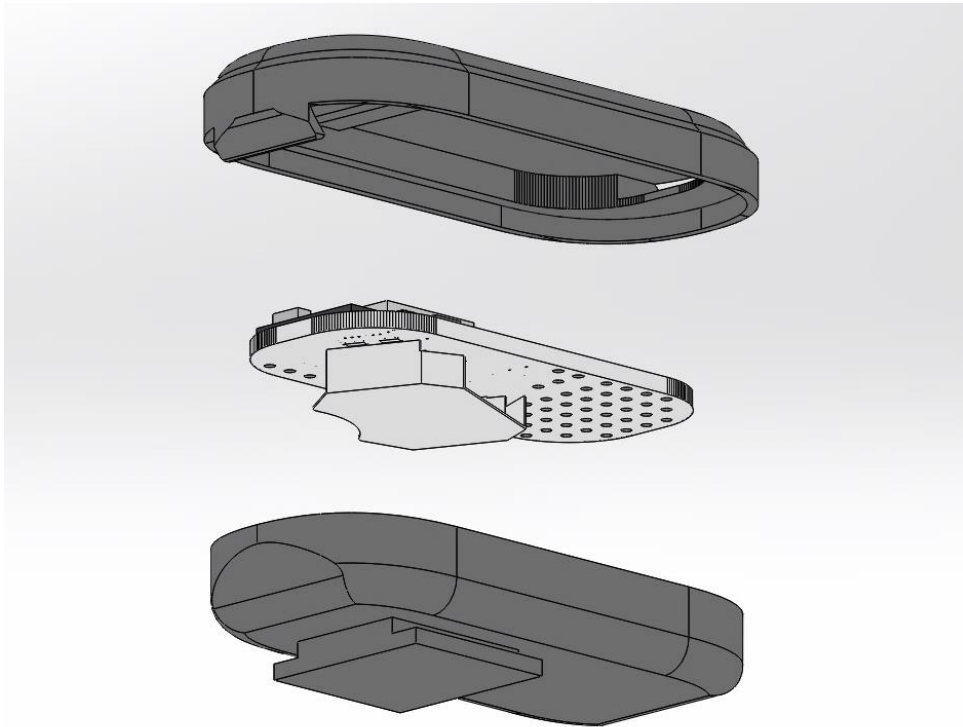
The case, with the LightBlue Bean inside of it, exploded in the assembly view inside SolidWorks.
